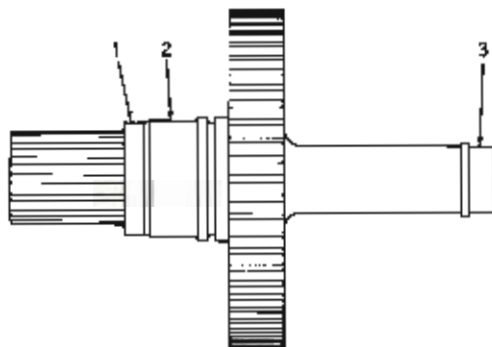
Drum Pinion Shaft Assembly, R.H. Shown
